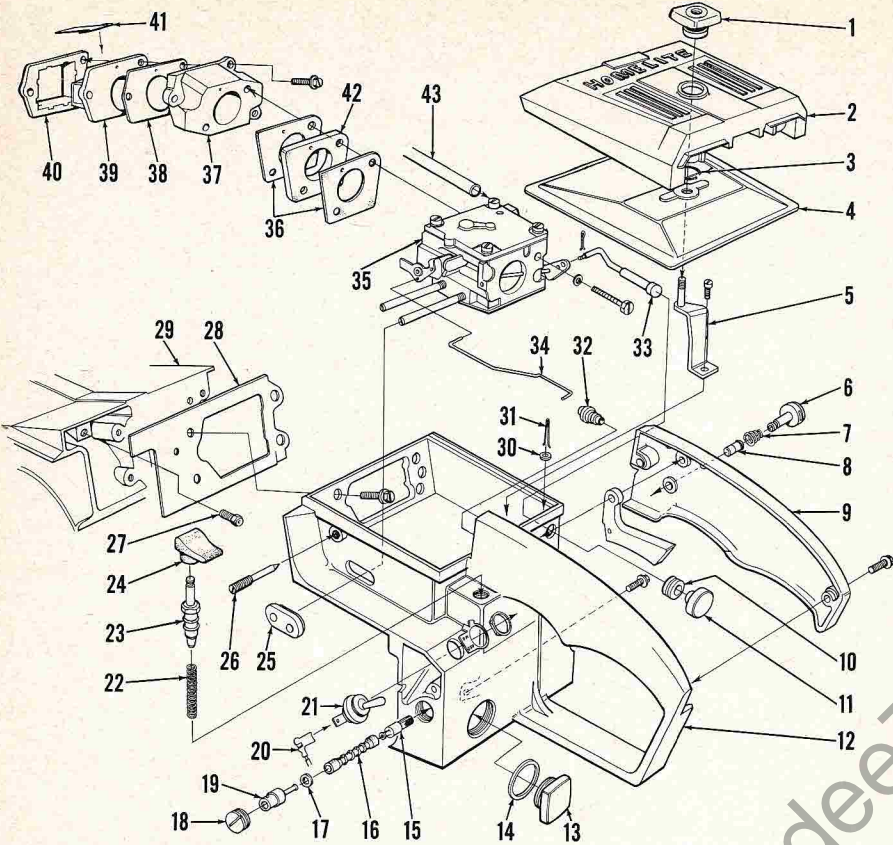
Exploded view of throttle handle, air box chain oiler tank assembly and related parts. When cementing new gasket (28) to crankcase (29), insert reed valve retainer (40) in crankcase opening to align gasket. Fuel tank is vented to carburetor chamber in air box through vent valve (27).
